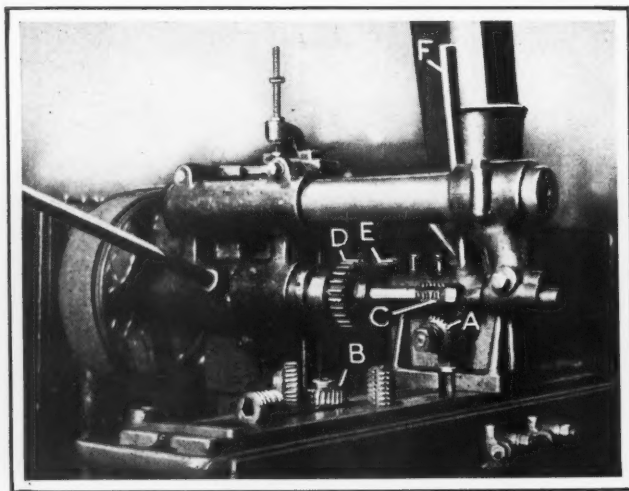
Fixture Used on Milling Machine for Hobbing Worm-gear
